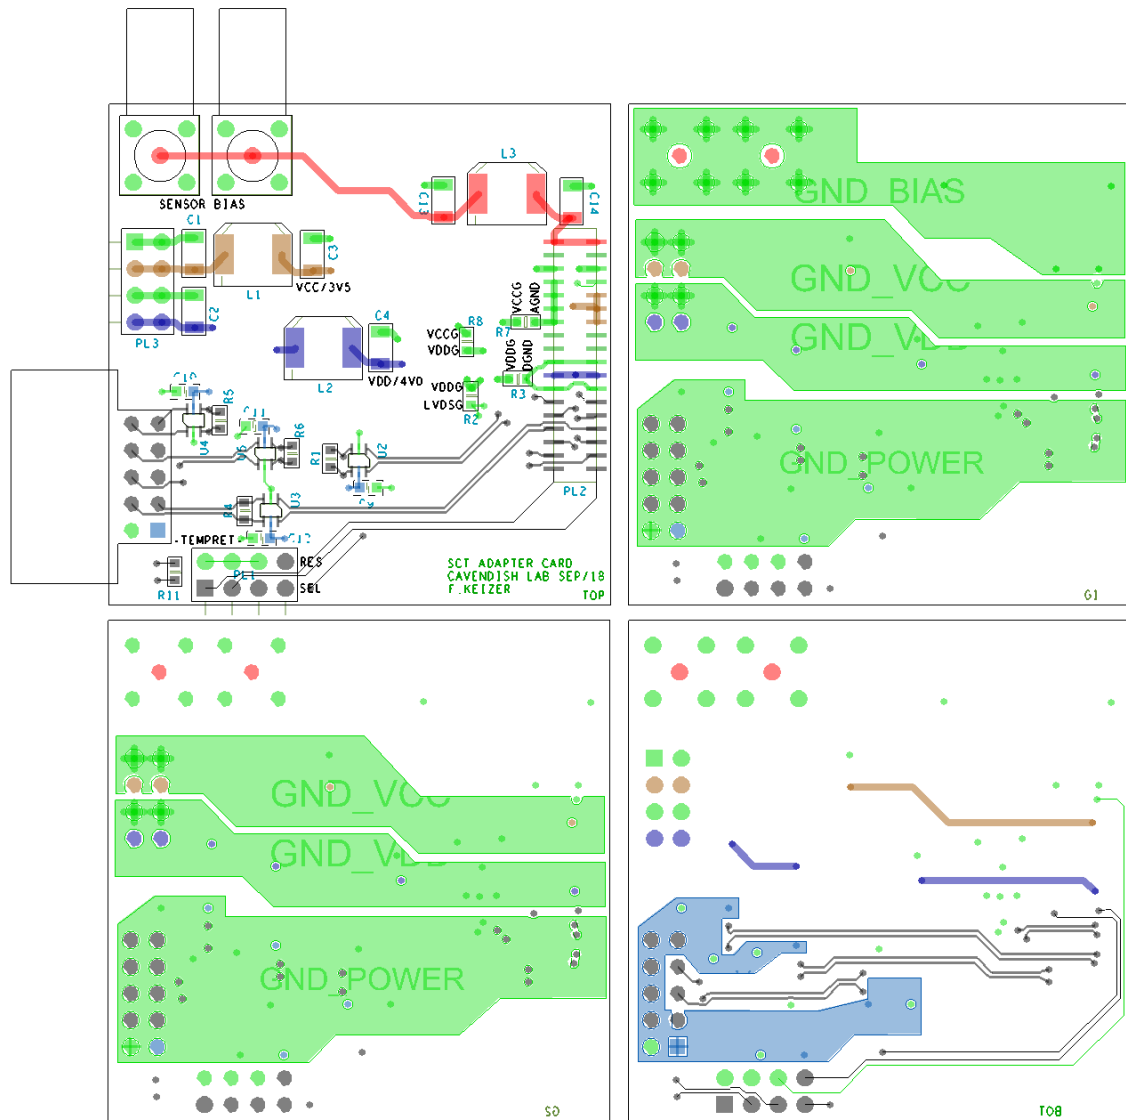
Four-layer PCB layout of the V2 adapter card. The switching power regulators have been removed and two electrical ground planes are added. A set of surface-mount resistors on the top layer can be used to choose the electrical ground configuration.
